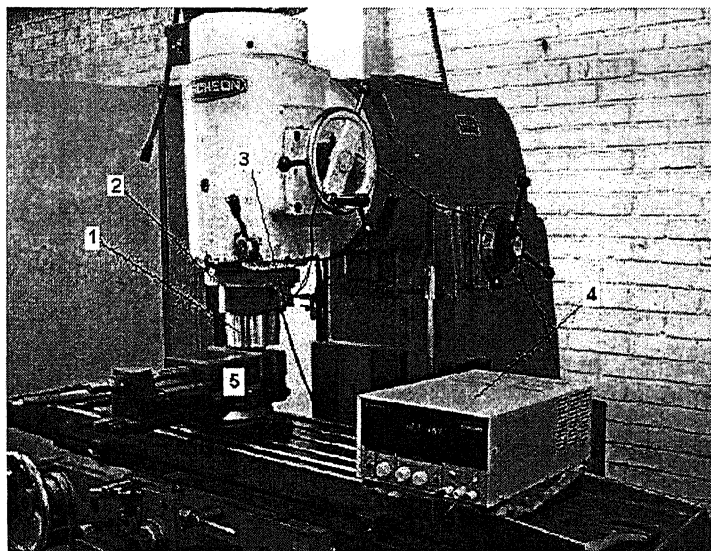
MAF setup mounted on vertical milling machine - 1:magnet, 2:casing, 3:sliding conductor contact, 4:dc supply, 5:machine vice [17]
